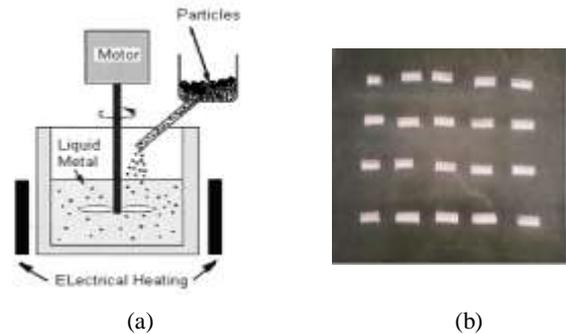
(a) Stir Casting Setup (b) Composite specimens
